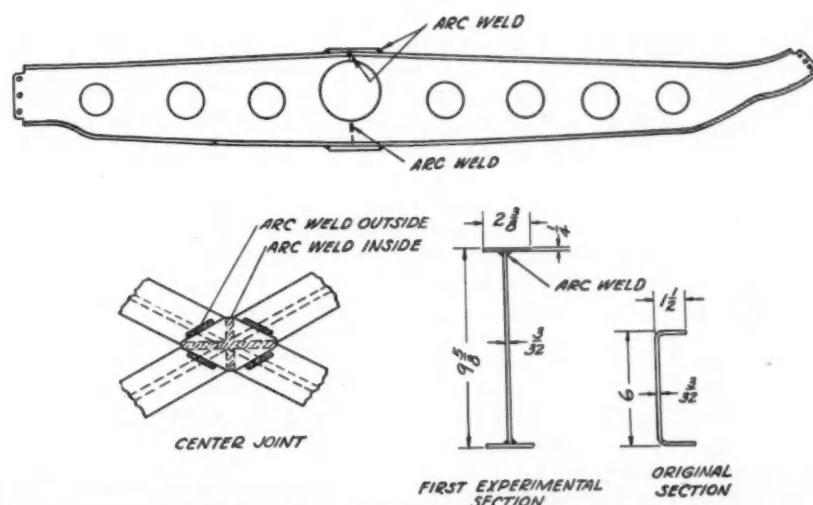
Frame built up by welding described in the paper of D. W. Sherman
